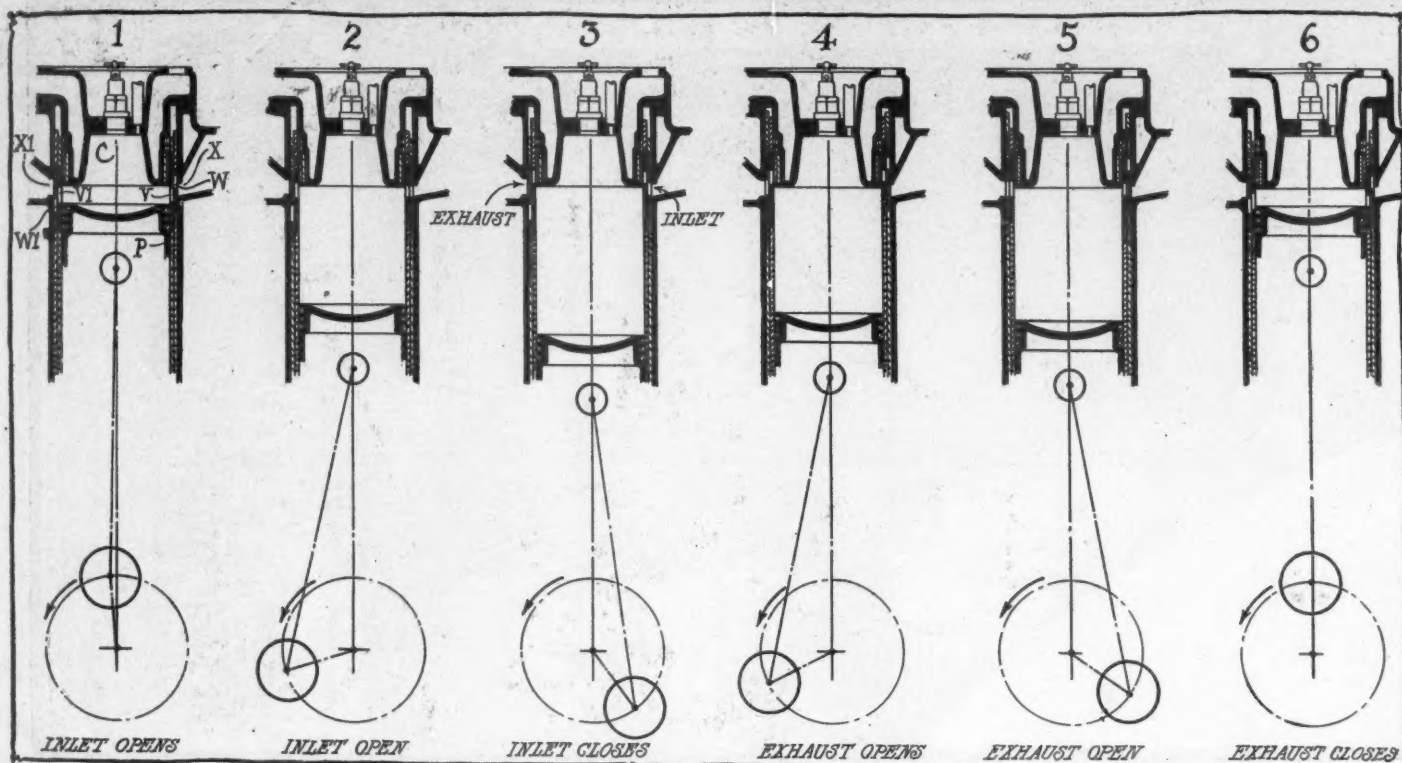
DIAGRAM ILLUSTRATING SLEEVE-VALVE ACTION OF STEARNS-KNIGHT MOTOR
